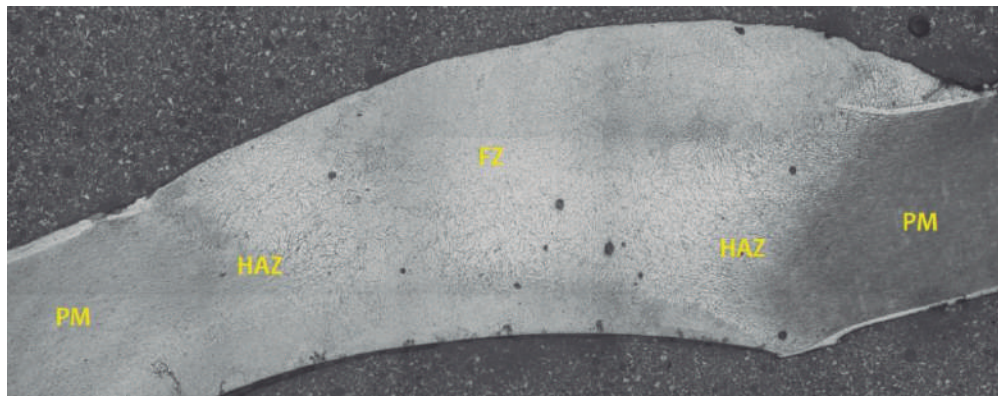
Macrostructure of weld cross section, showing the zones of parent metal (PM), heat affected zone (HAZ) and fusion zone (FZ).
